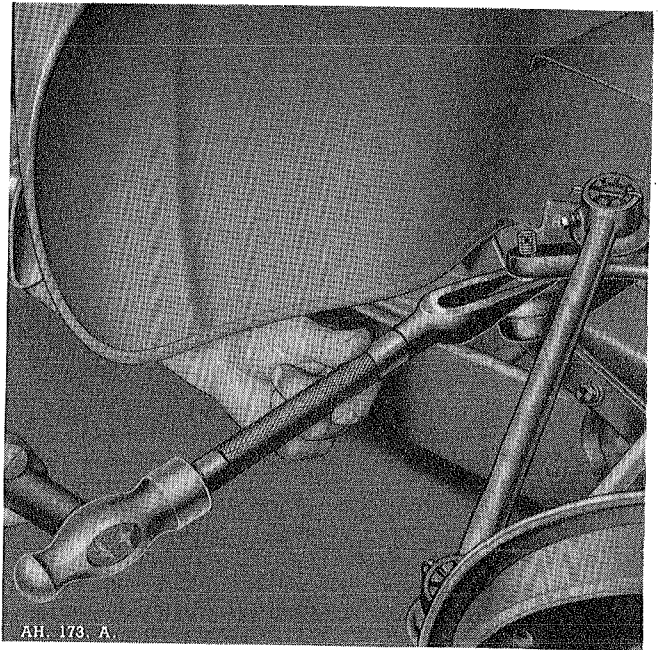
Using Service Tool 18G 125 to separate the ball and socket connection from the steering lever.
